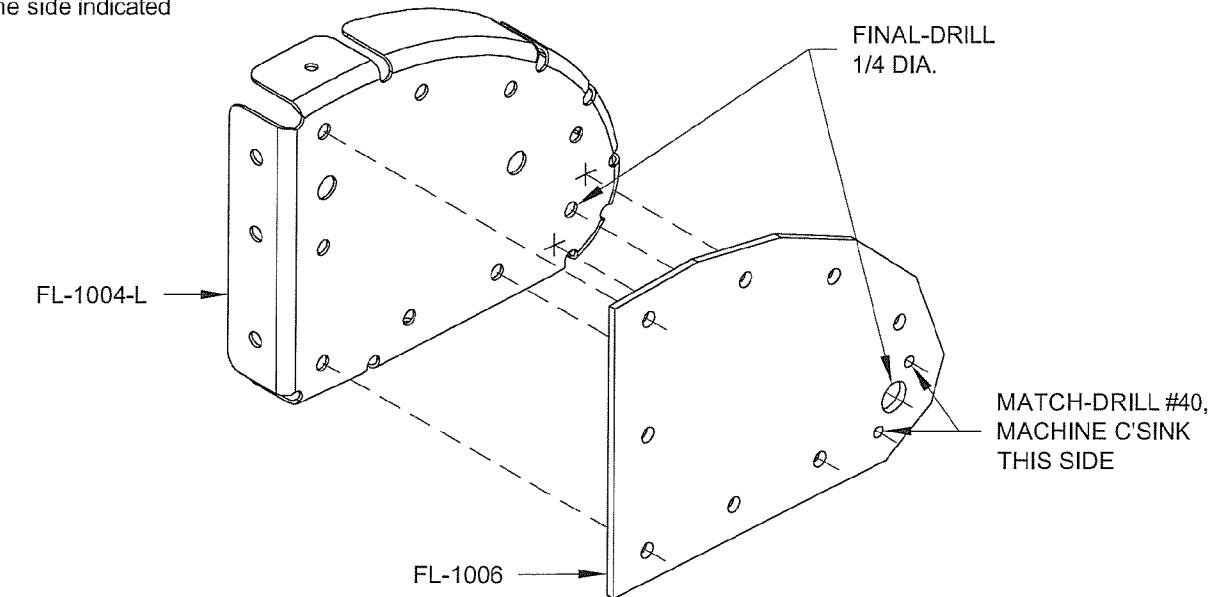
OUTBOARD ROD END RIB SUBASSEMBLY
